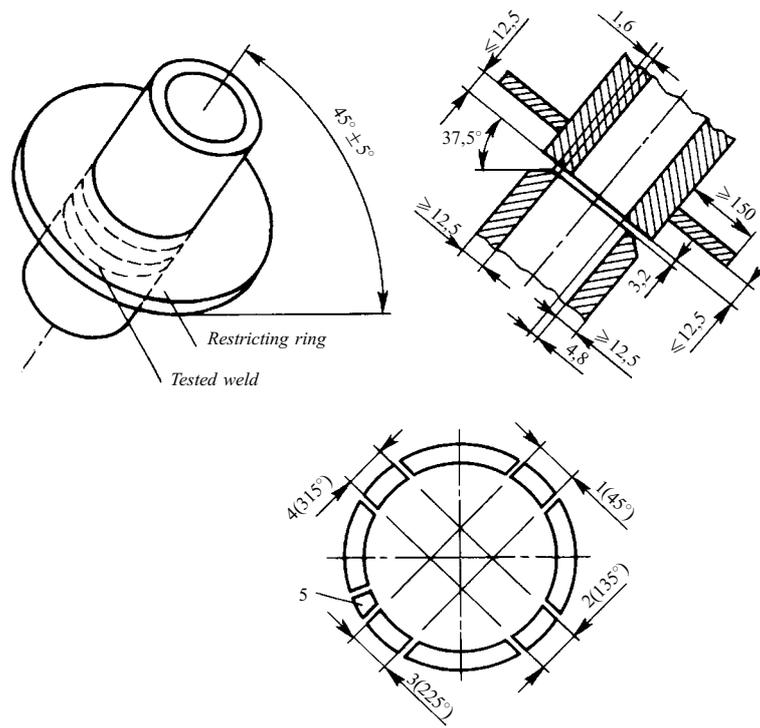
Test piece of P₆ pipe joint with a restricting rings;
